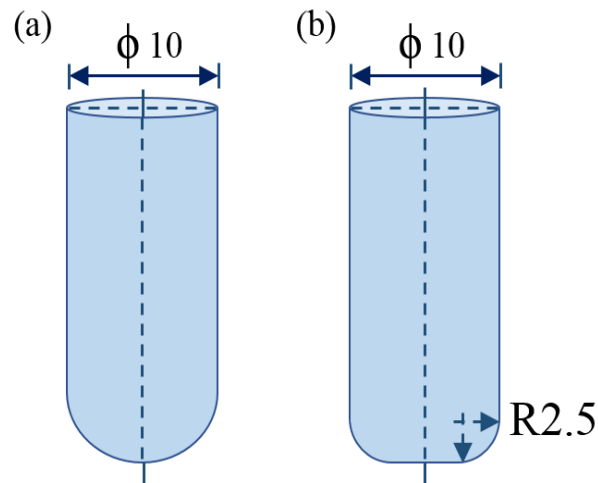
Incremental sheet metal forming tools: (a) hemispherical-end, and (b) flat-end with chamfered edges. (All dimensions are in mm).
